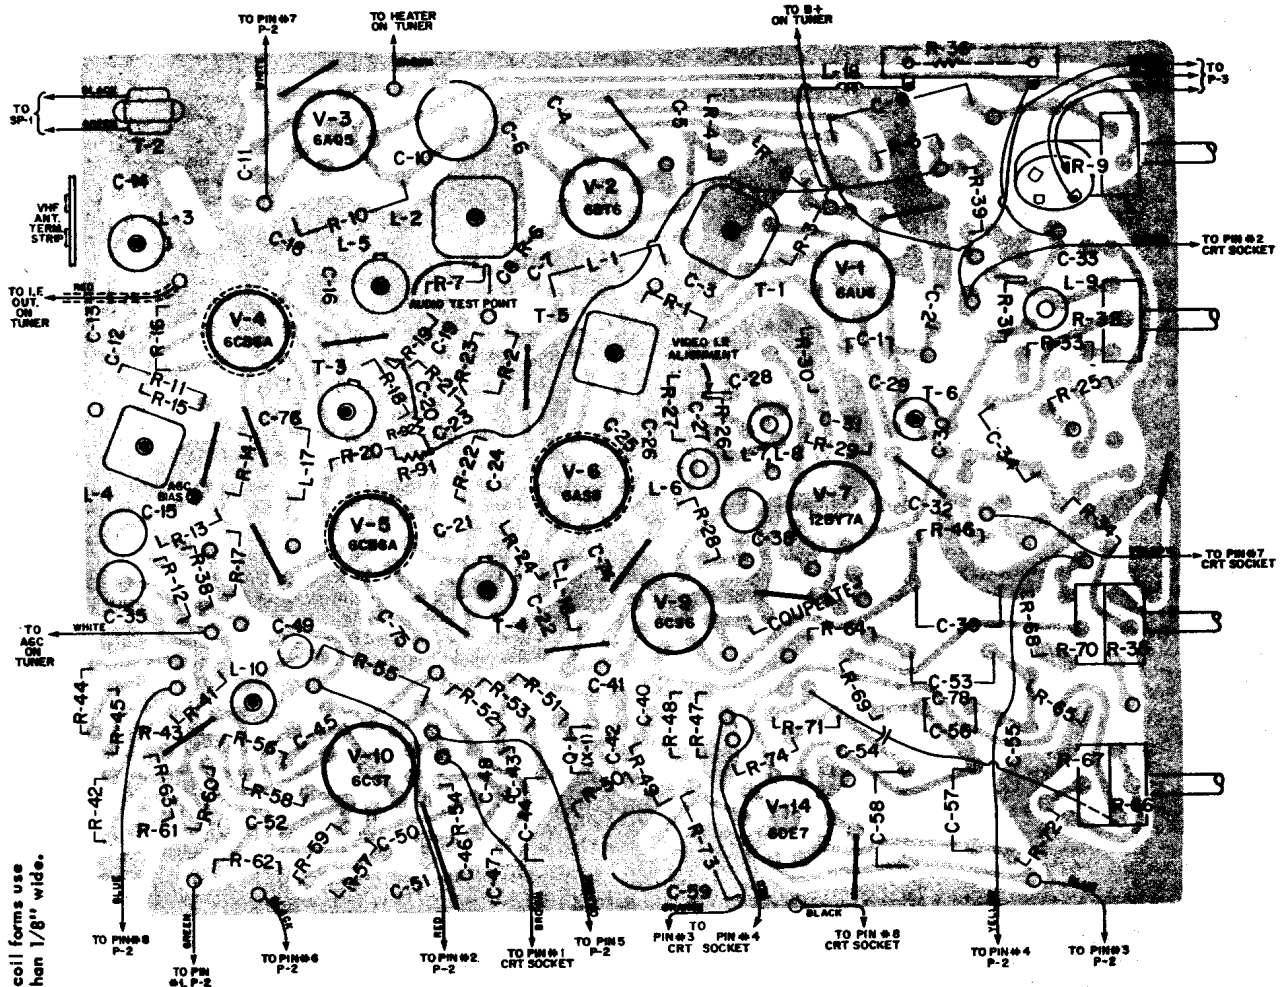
ETCHED PRINTED CIRCUIT BOARD CHASSIS (TOP VIEW)
